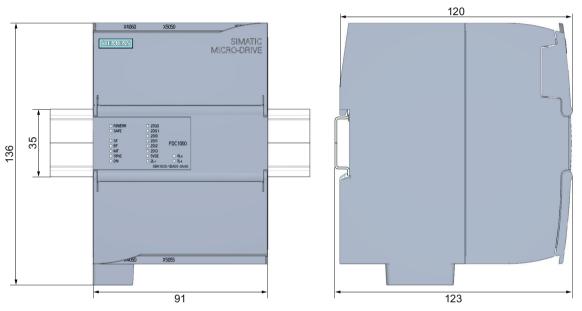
Dimension drawings of SIMATIC MICRO-DRIVE PDC1000, front and side view (as examples, depending on mounting rail type used)
